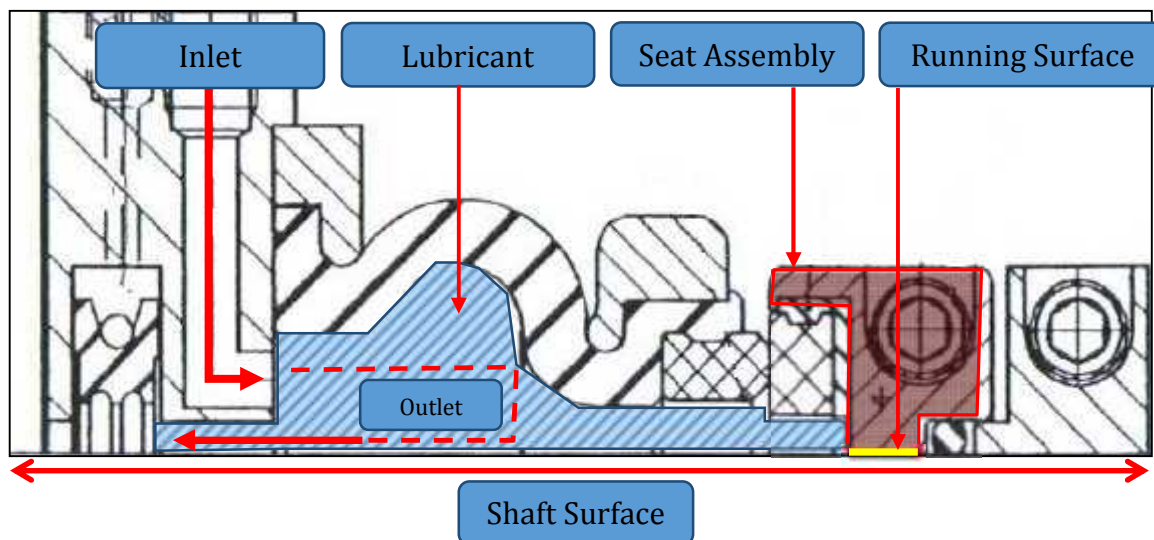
Cross Section of a Stern Tube Seal Attaching to a Shaft
